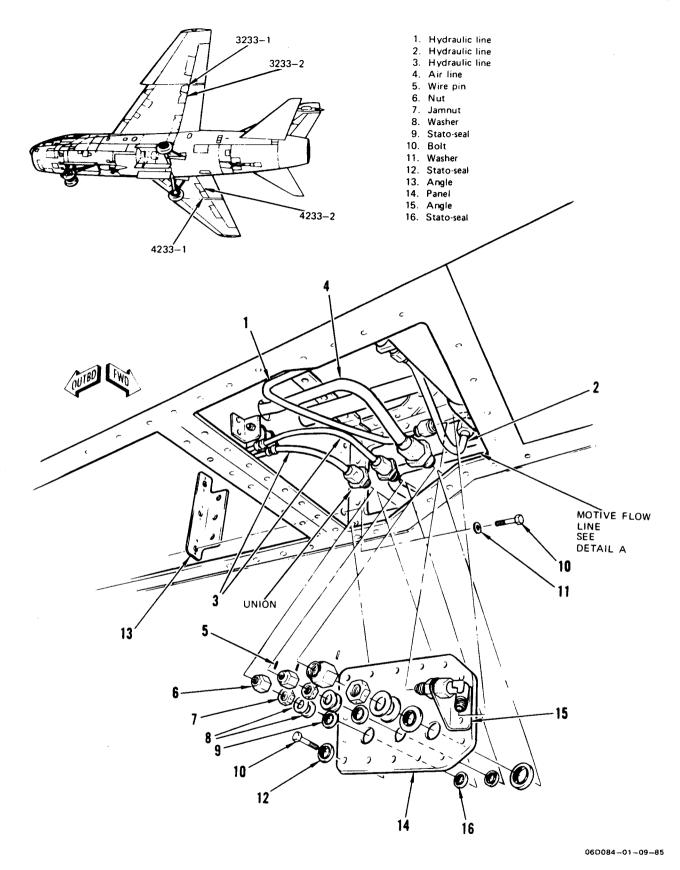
Removal and Installation; Wing Ejector Pump Nozzle (Sheet 1 of 2)
